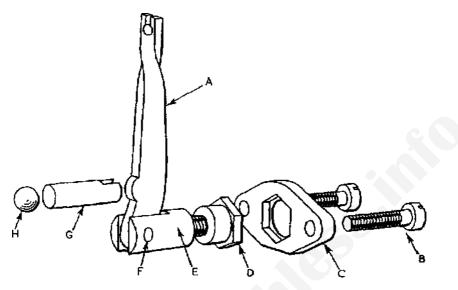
ARRANGEMENT OF CLUTCH-OPERATING LEVER.
